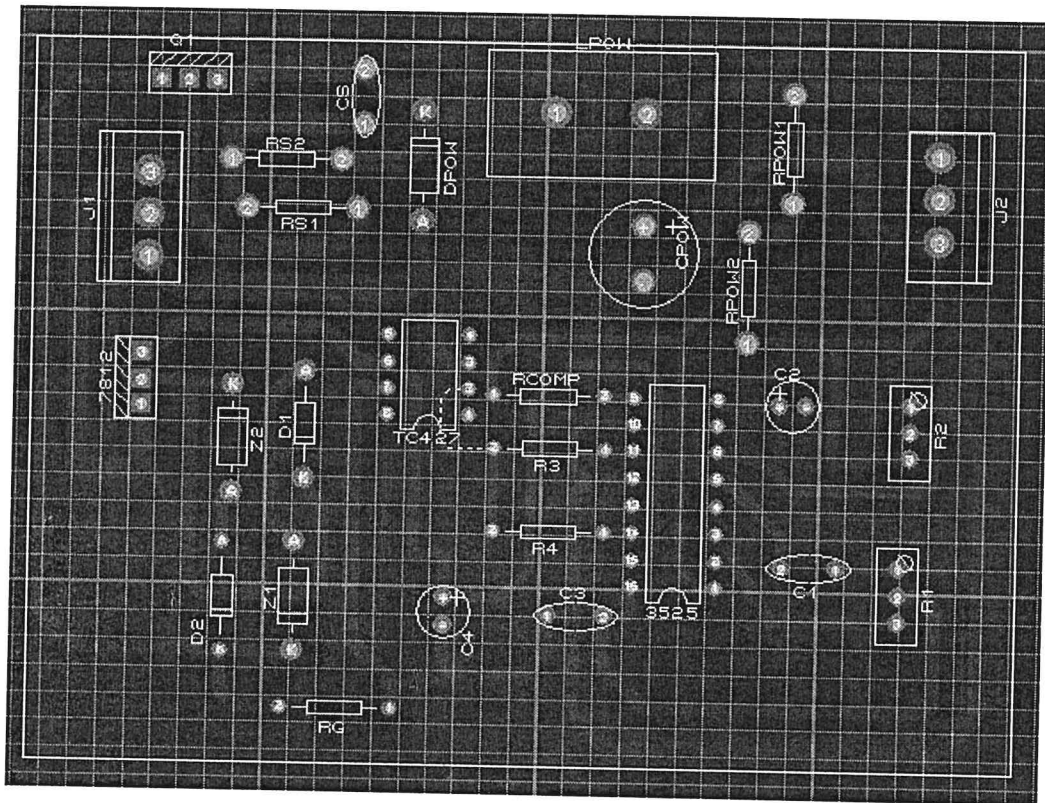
Design of PCB Layout drawn up by the project group in ARES.
